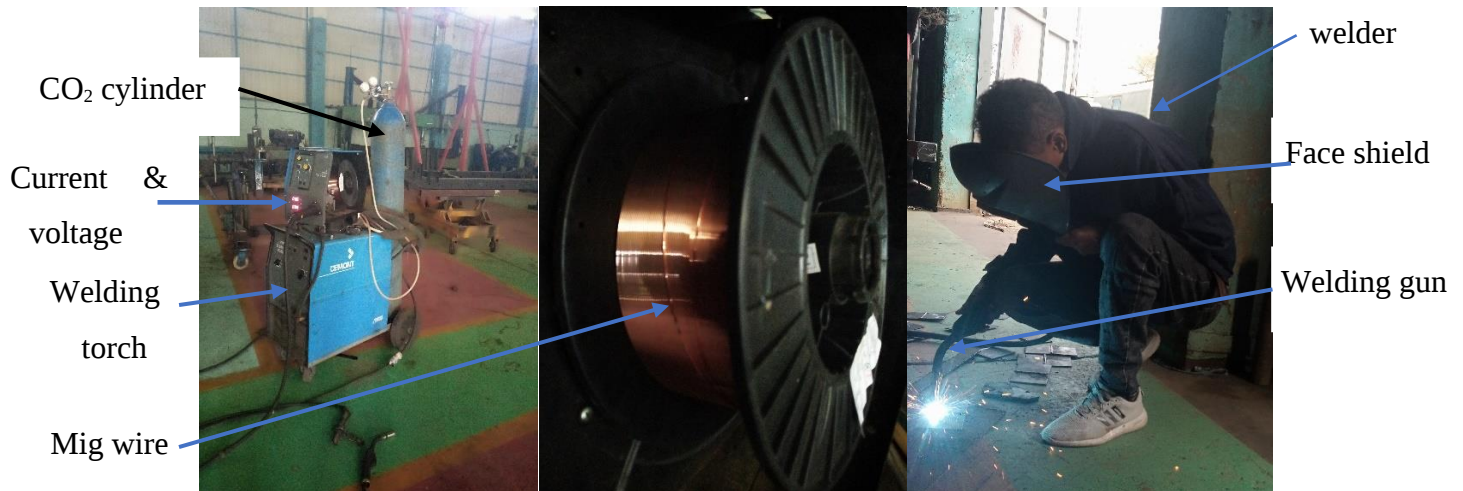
MIG BLUMIG 503S model machine and specimens for welding
